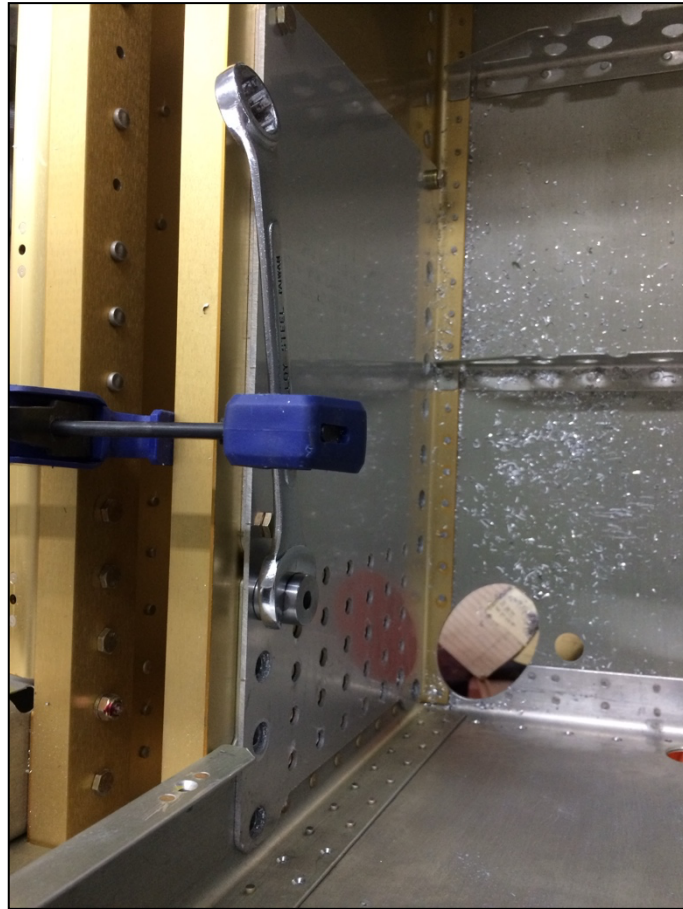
POSITIONING THE DRILL TEMPLATES
